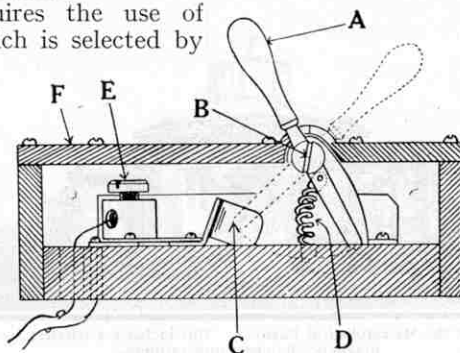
Sectional drawing of the first tumbler switch, invented by Mr. H. Faraday in 1884.
